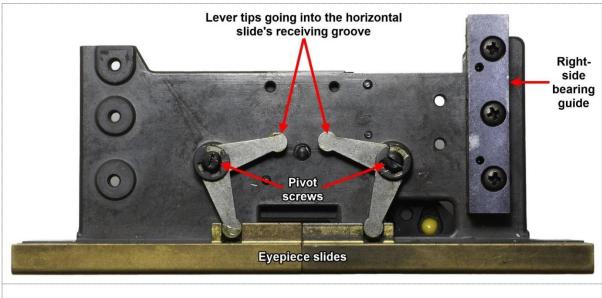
The head front viewed from above after the left-side bearing guide and the horizontal slide have been removed.
